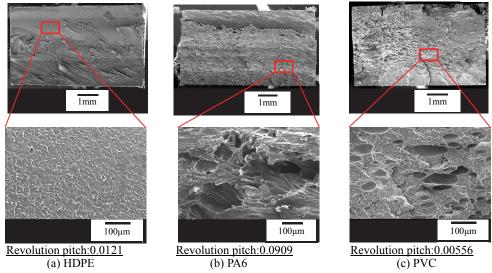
Observation of fracture surface in each material joint welded with the lowest revolution pitch condition (see Table 2).
